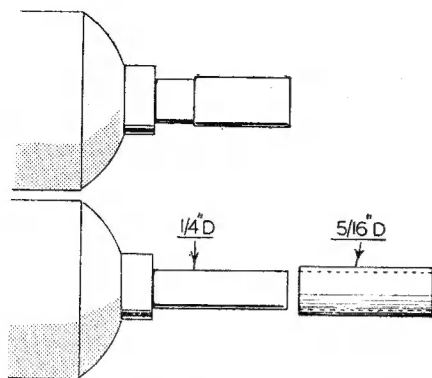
Above—the worn armature spindle. Below—fitting the bearing sleeve
